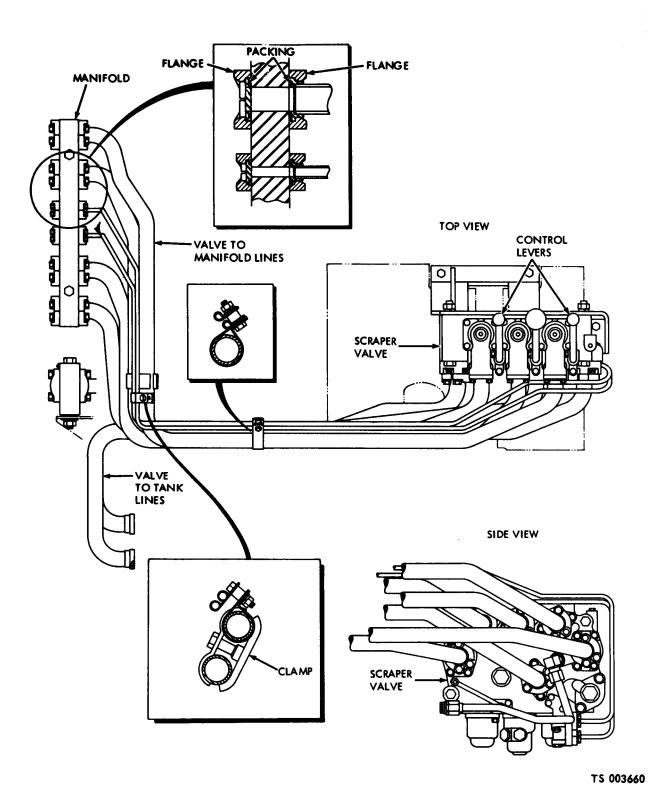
Hydraulic system hoses, lines, and fittings, removal and installation. (sheet 3 of 4).
